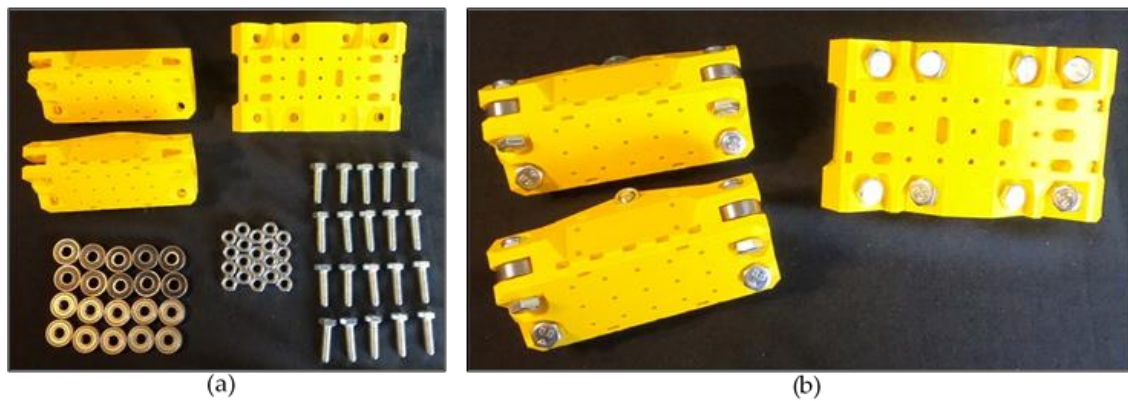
(a) X-axis and Y-axis sliders with all the bearings, bolts, and locknuts; (b) X-axis and Y-axis sliders with bearings installed.
